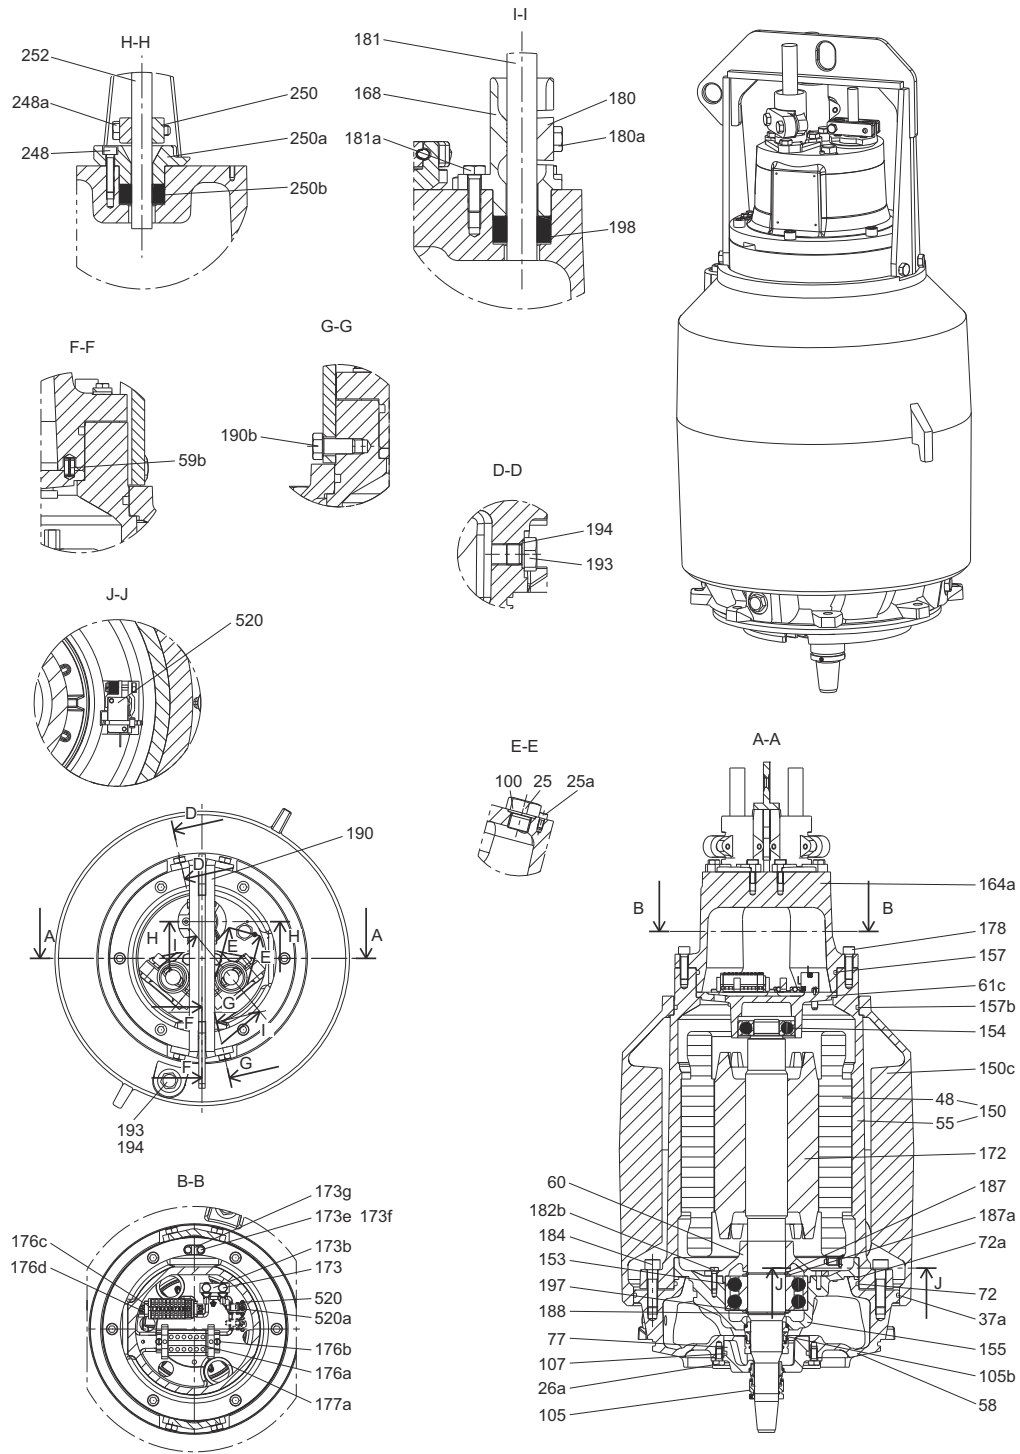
Explosion-proof motor with cooling jacket (installation types C, D and H)
